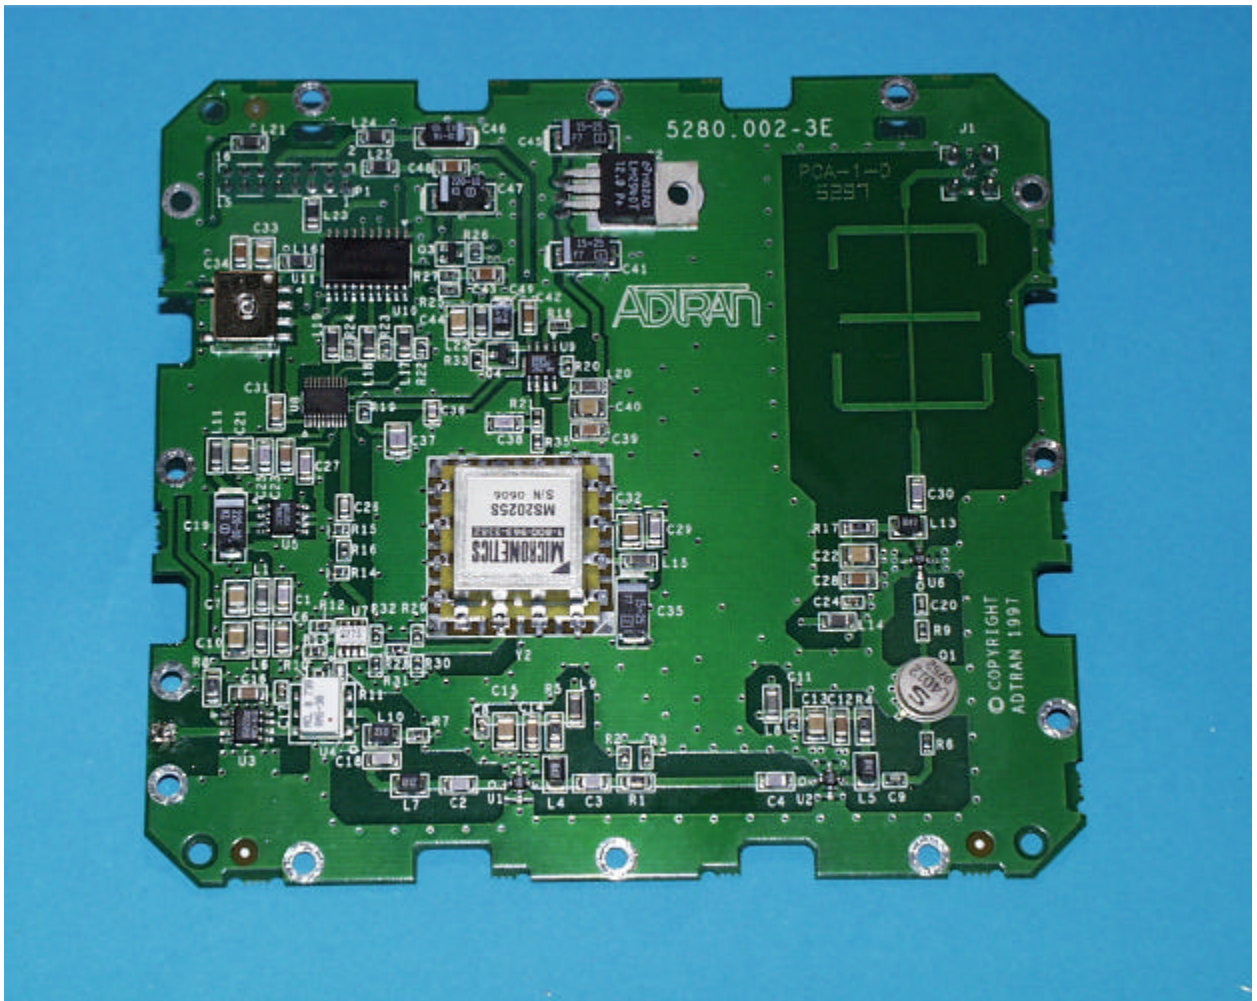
RF Assembly/RF2 PCB Bottom View
